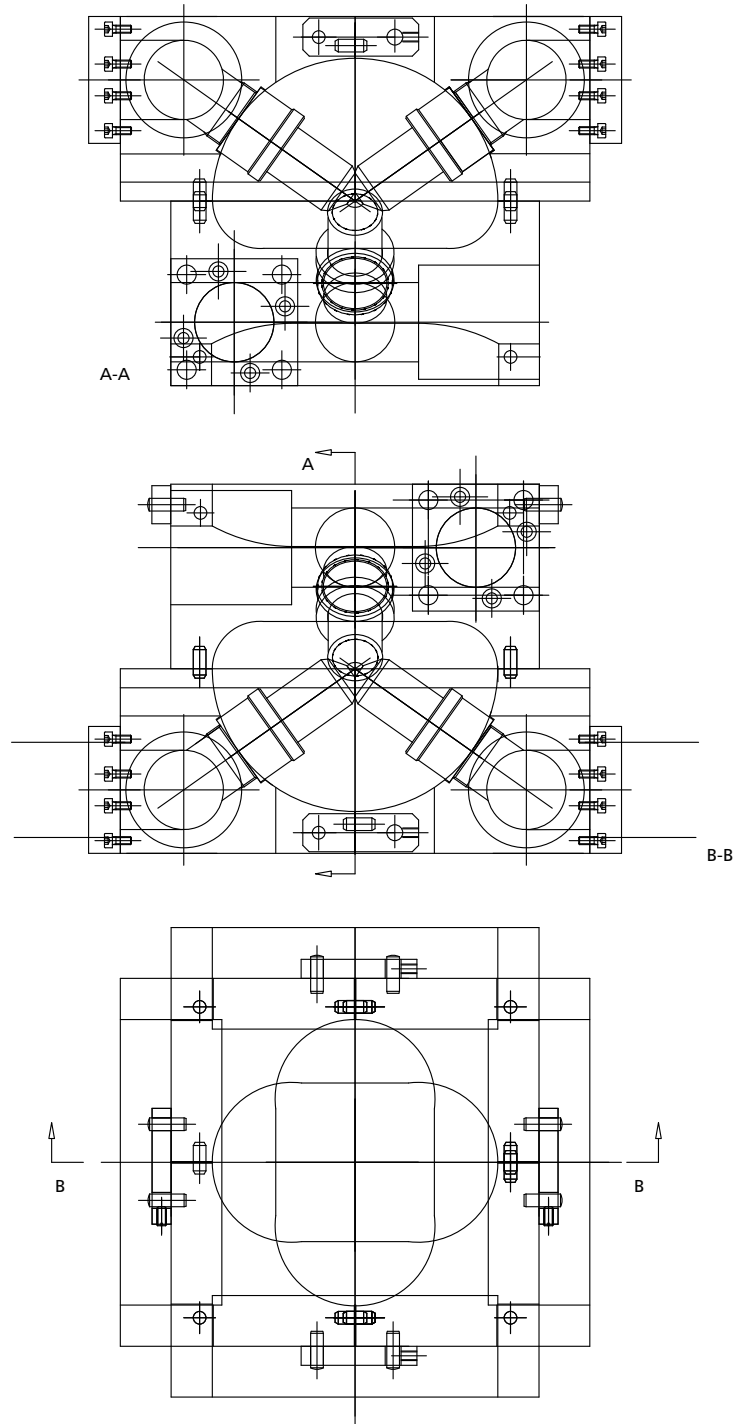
The assembled view of the four units to hold the objectives in the MIAM.
